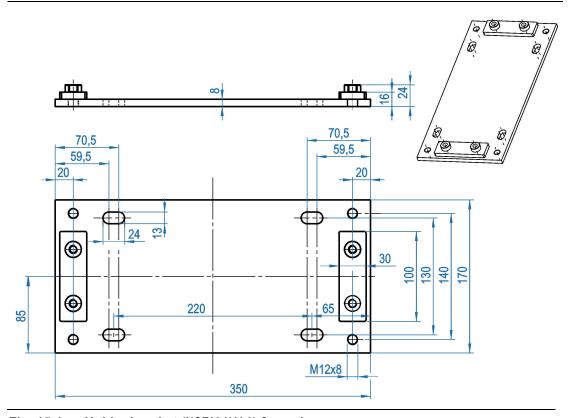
Holder bracket (NOZ00 HAL0) for rod sensors
